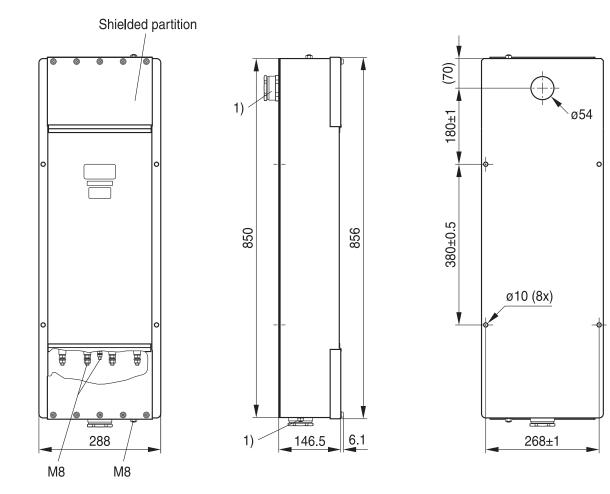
B84299C1630E001 (4 × 63 A), B84299C1101E001 (4 × 100 A)
